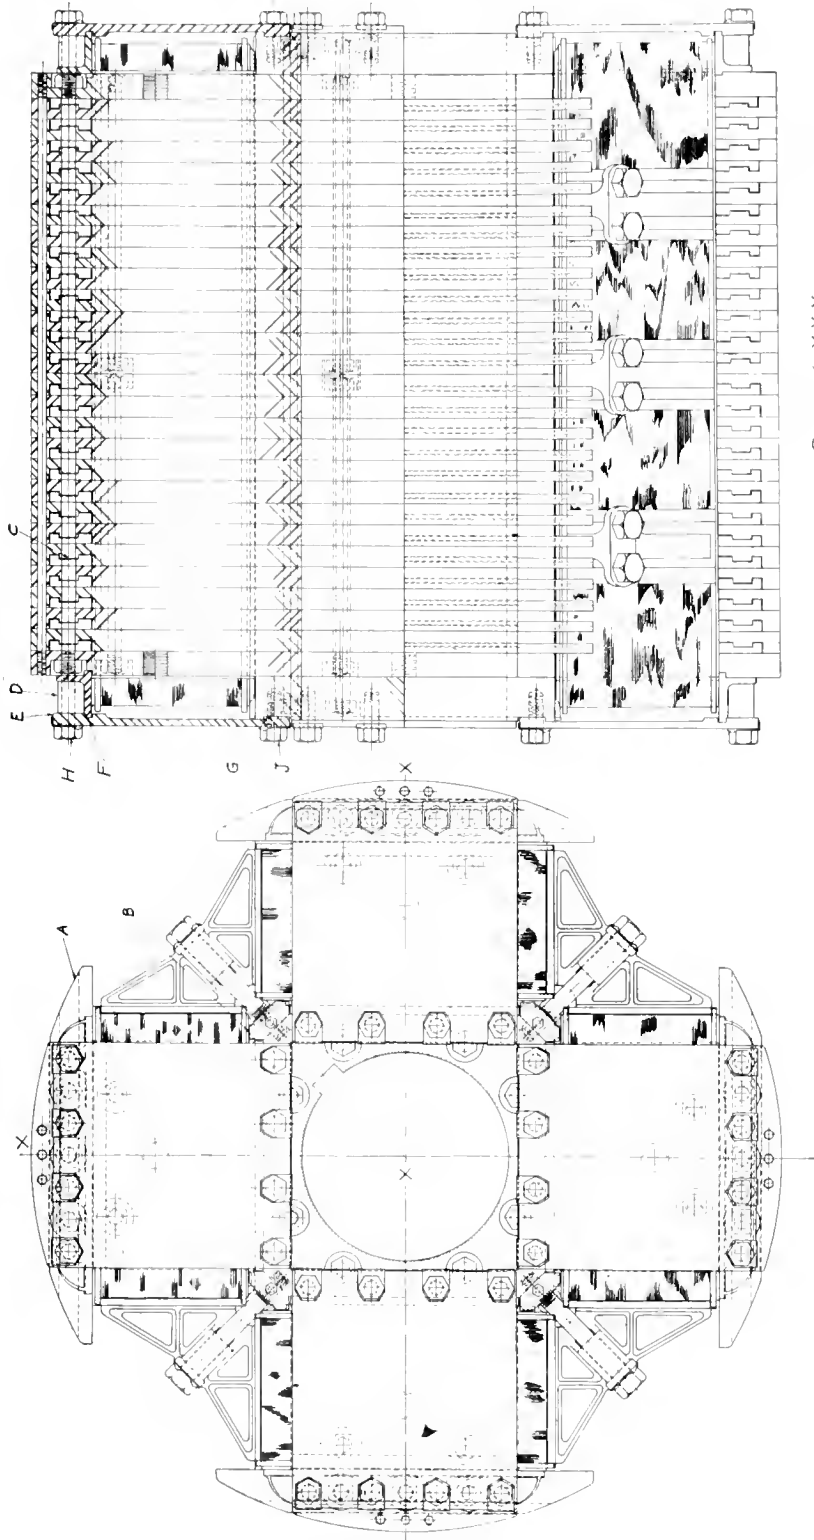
Rotor Assembly of the 7000-kv-a., 750-r.p.m., 14,000-volt Alternator
